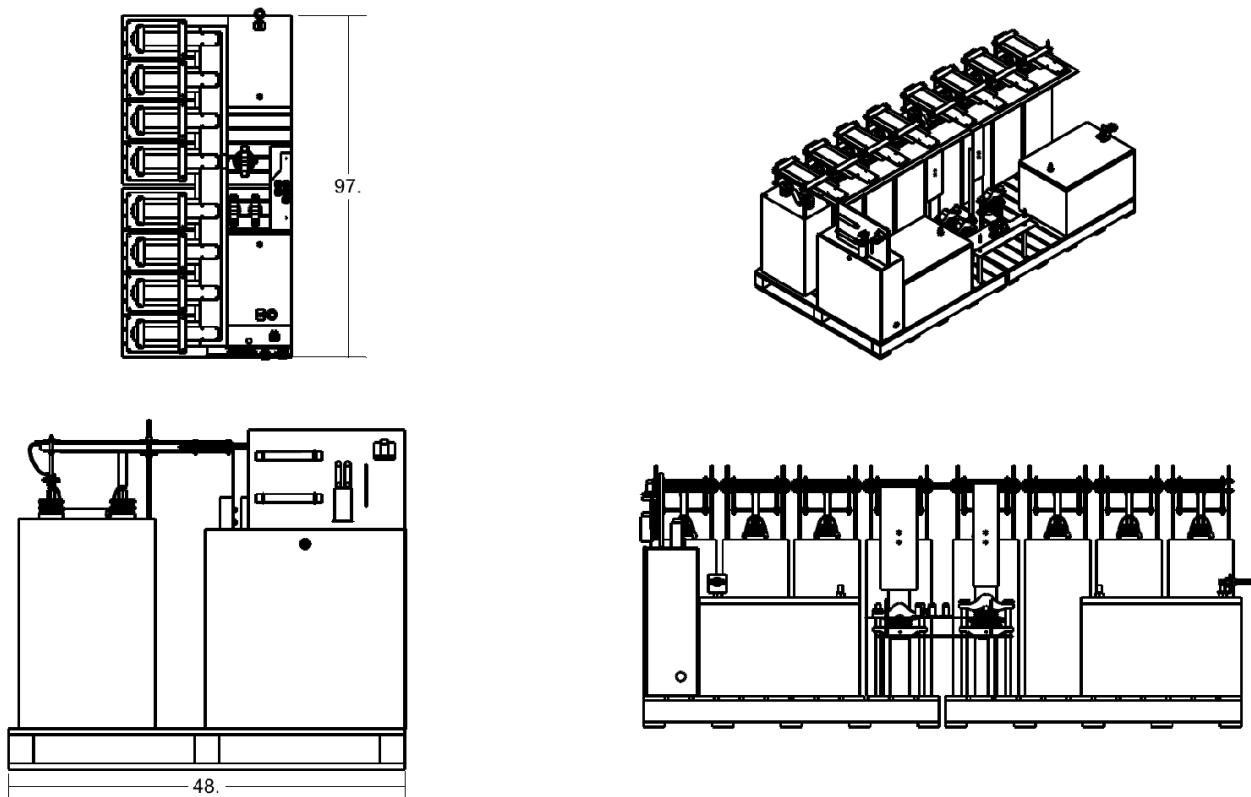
Engineering Drawing — Magnetic Field Coil Capacitor Bank, Drawing No. 0001, Rev A, dim in inches
